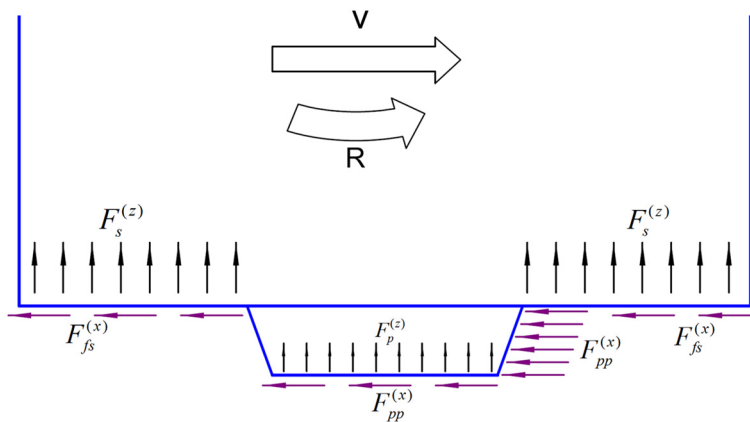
Schematic illustration of the force distribution on FSW tool (Side view parallel to the weld line)
